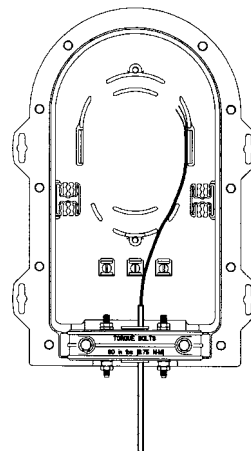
ROUTING CENTRAL TUBES FOR CABLES IN CENTER ENTRY
